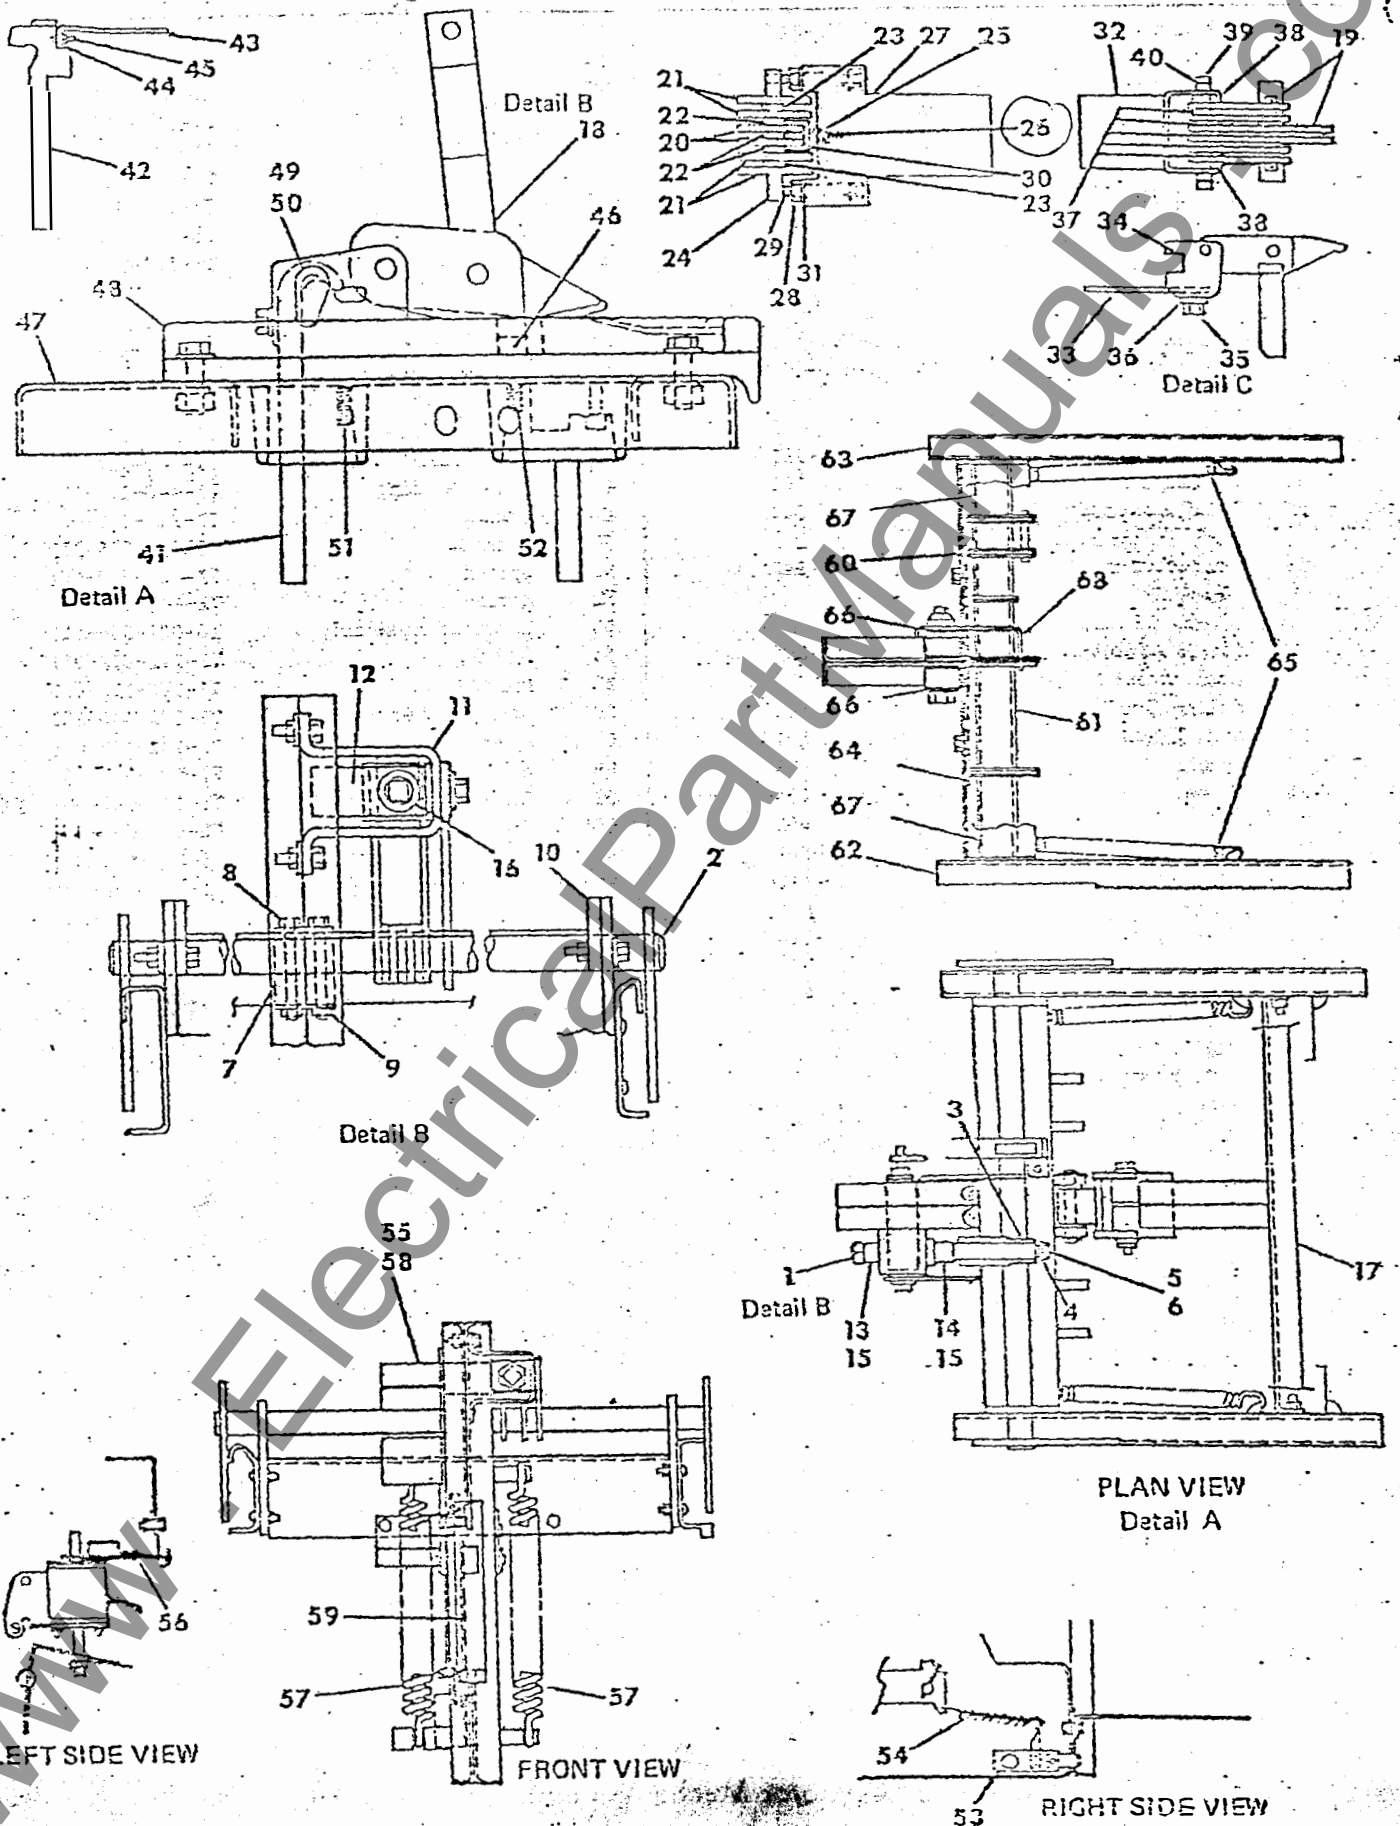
Operator Mechanism and Panel Assembly. (18-717-776-520 (AD))
